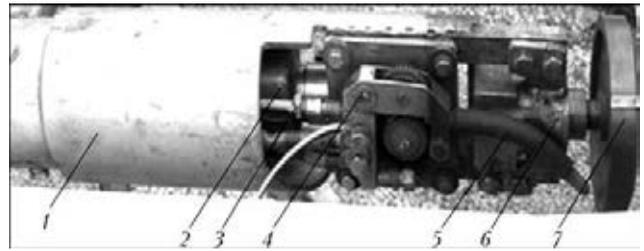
Automatic machine for welding in confined conditions at great depth: 1 – case; 2 – rotation mechanism; 3 – guide channel; 4 – feed mechanism with nozzle oscillator; 5 – nozzle; 6 – fixtures and elements of current transfer to the cap; 7 – cap
